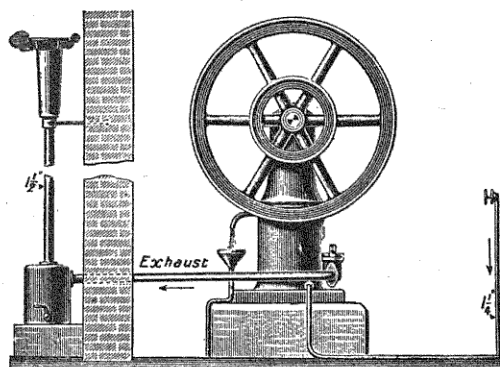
Cooling with water under pressure and exhaust pipe for a small vertical engine
